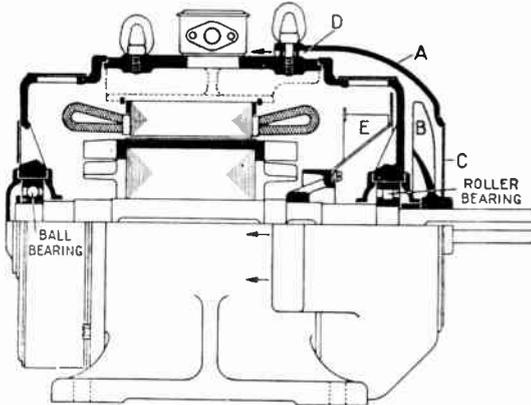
A.—TOTALLY ENCLOSED FAN-COOLED MOTOR. (B.T.-H. Co.)
